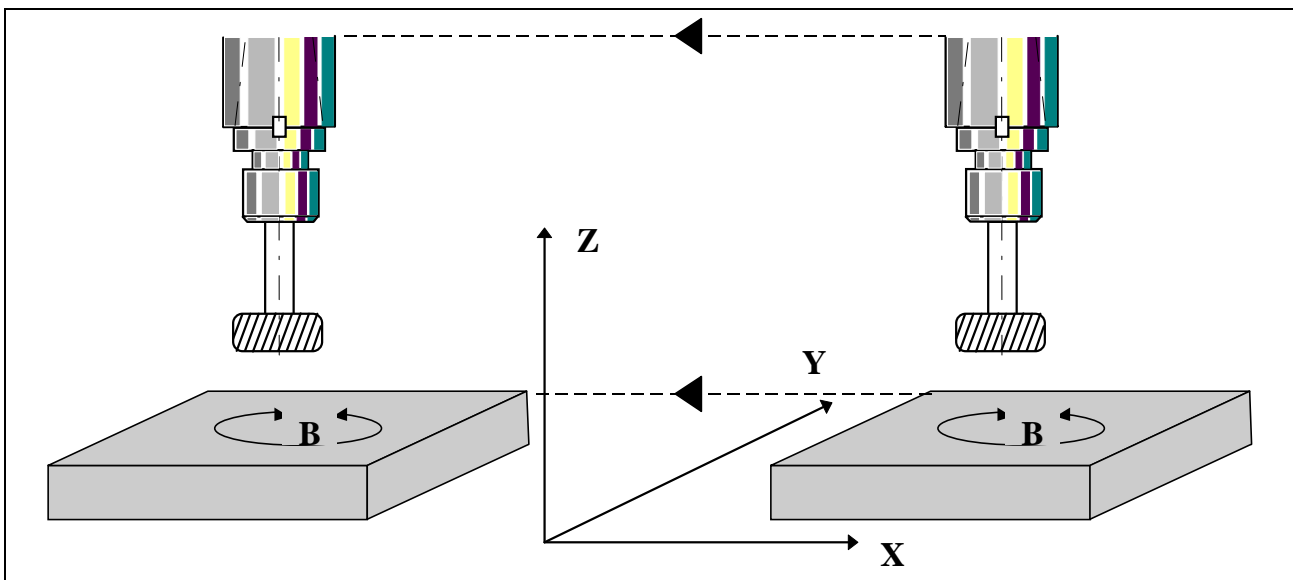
Axis transfer on a machining center having 2 machining tables
